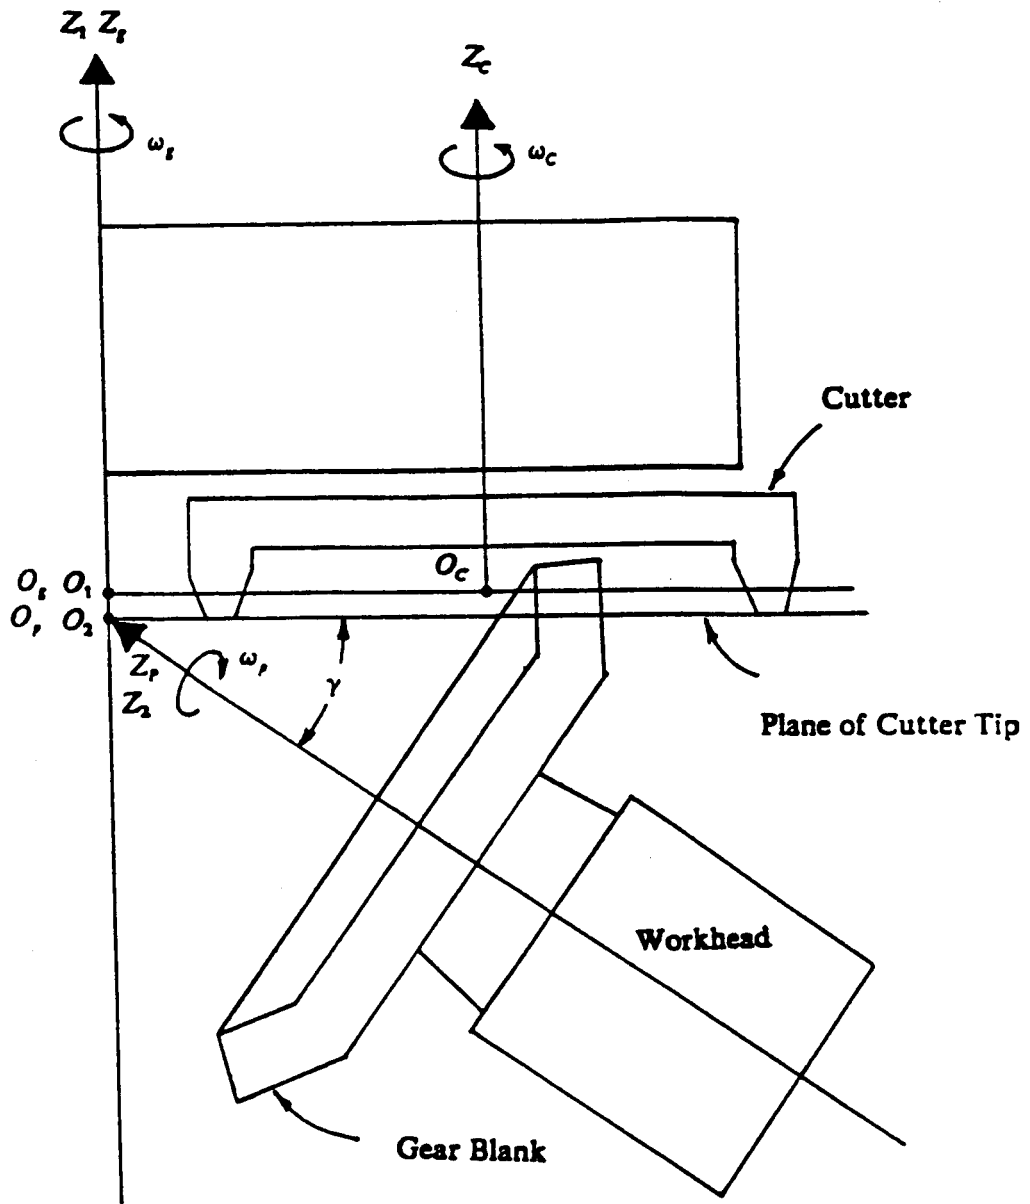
Machine Setting for Spiral Bevel Gear Manufacturing
